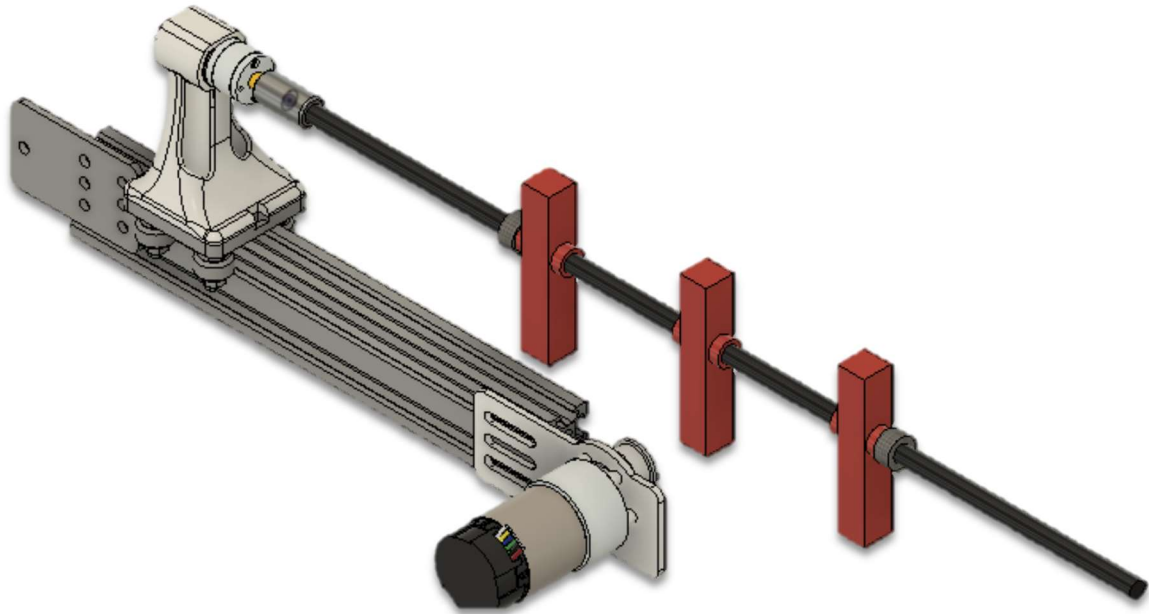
CAD drawing of the motor assembly (Himley, 2022)
